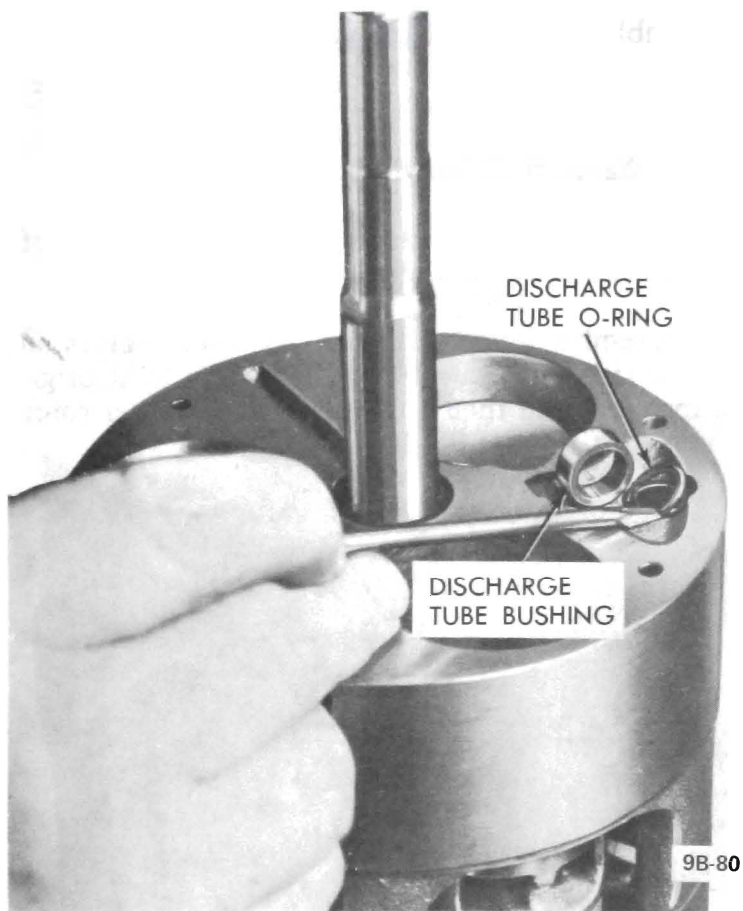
B-94 Installing Discharge Tube O Ring and Bushing
